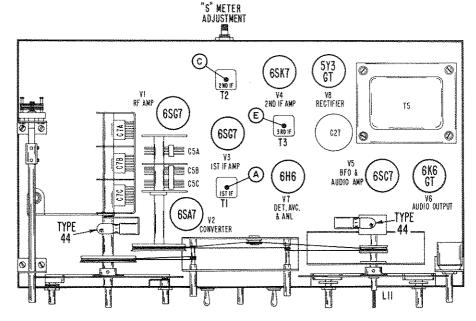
Top View of Chassis Showing Tube Locations and Alignment Adjustments
